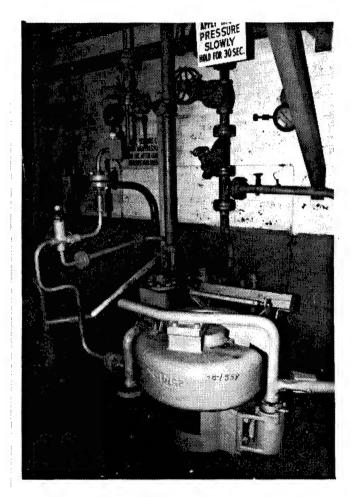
Building 208-2: Vertical blocking press at this Mixing House.
